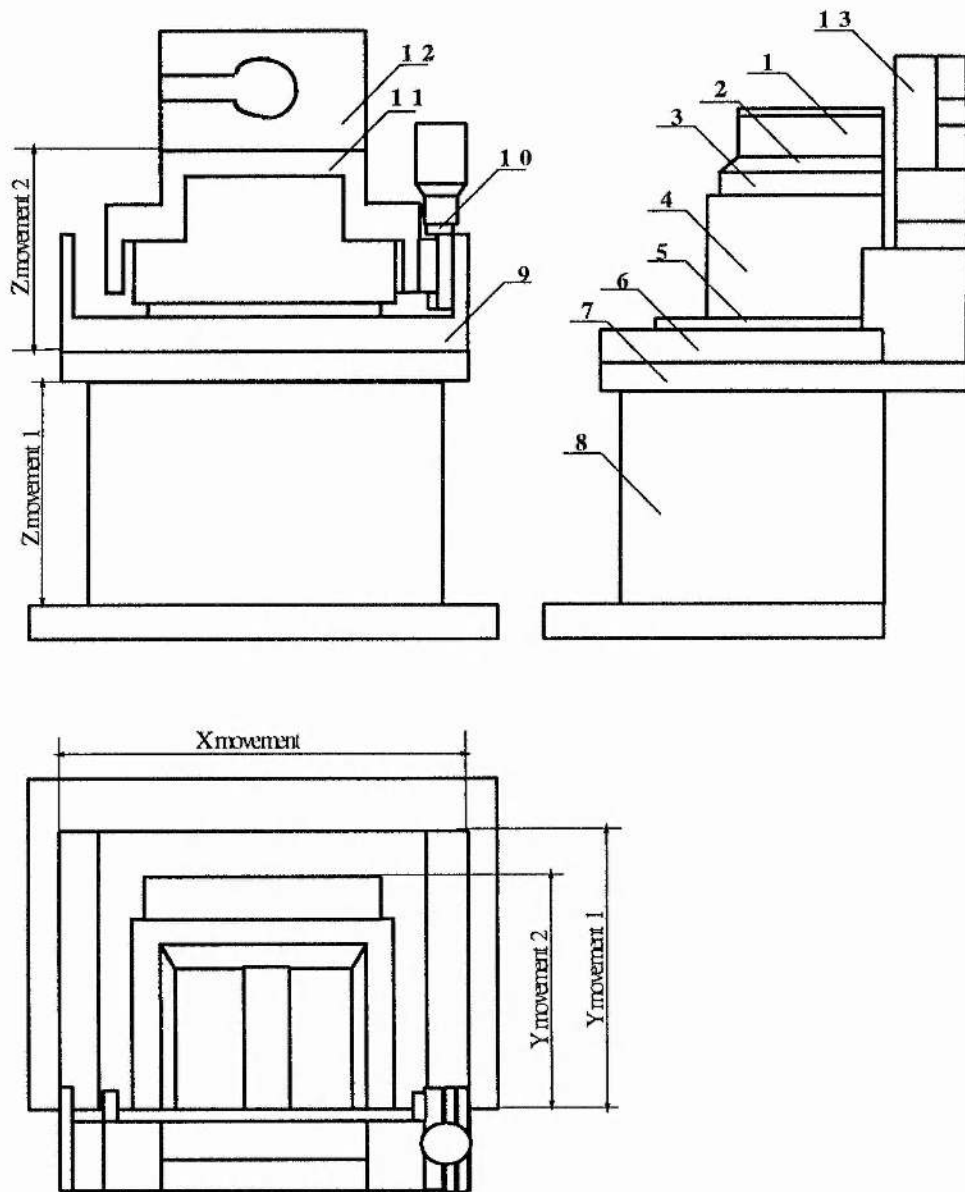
Assembly drawing of pump optics and diode laser mount, where: 1. Diode laser; 2. Cooling plate; 3. Peltier cooler; 4. Cooling block; 5. Plate I (for fixing purpose); 6. Y movement translation stage; 7. Plate II (for fixing purpose); 8. Three dimension translation stage; 9. Mount I; 10. Z movement translation stage; 11. Mount II; 12. Aspherical lens holder; 13. Cylindrical lens holder.
